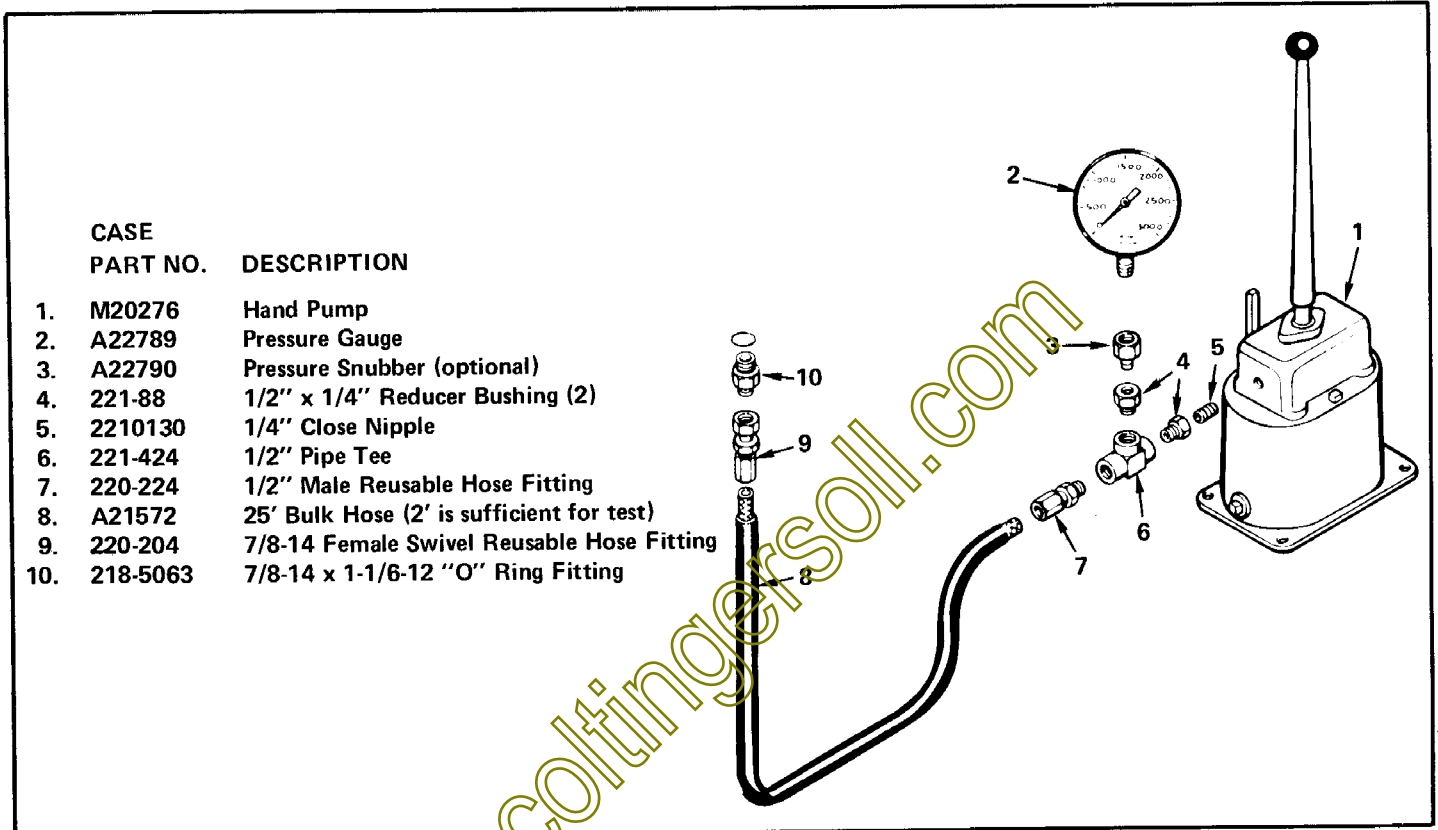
Hand Pump and Fittings to Check Relief Valve Cracking Pressures
